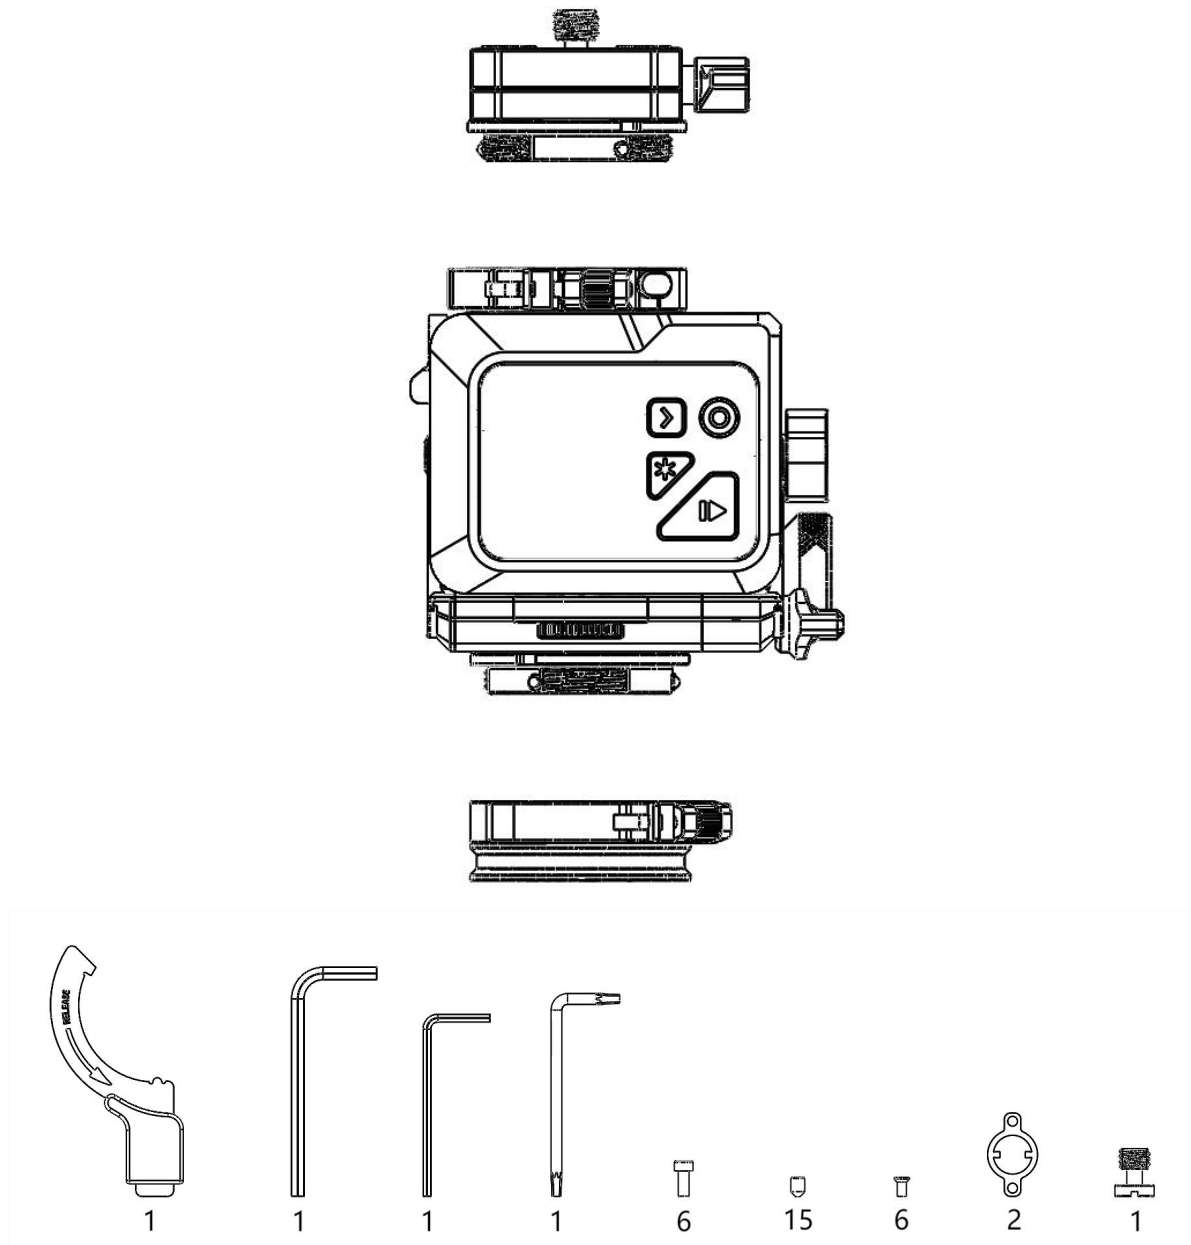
Package contents photo. Use the actual package photo and the line drawings below as the primary reference when checking the box contents.
